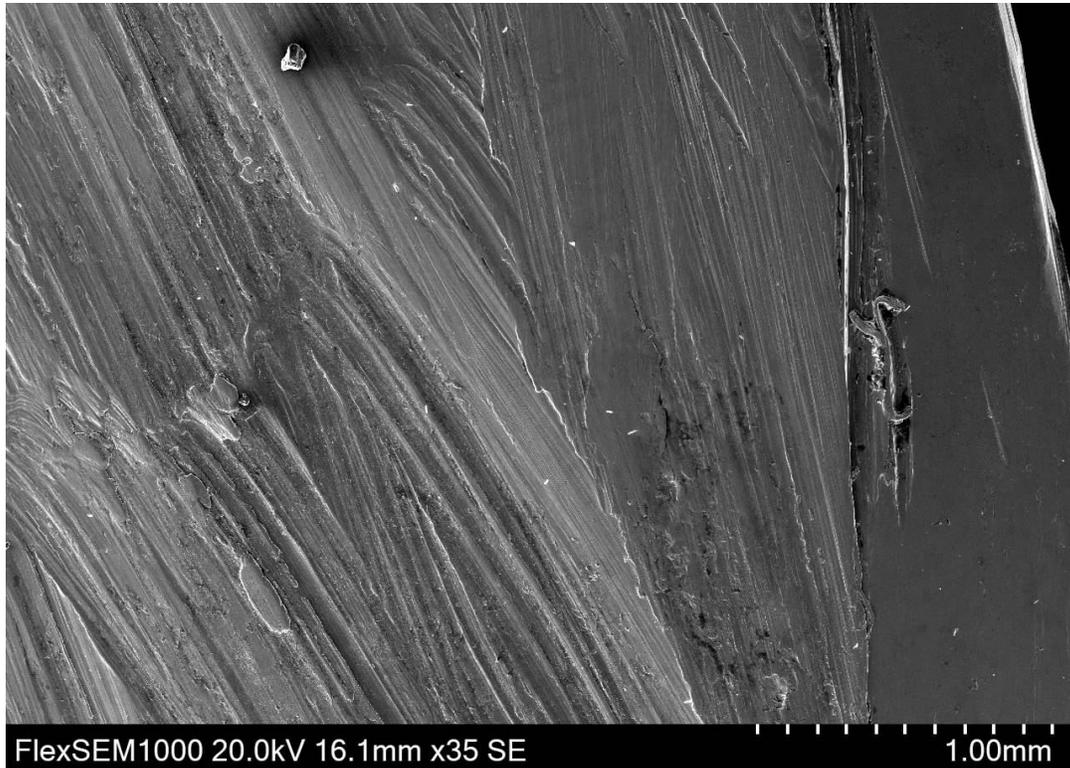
HEAVY SCRATCH MARKS ON THE FRACTURE SURFACE, ANOTHER AREA, BOLT C5
